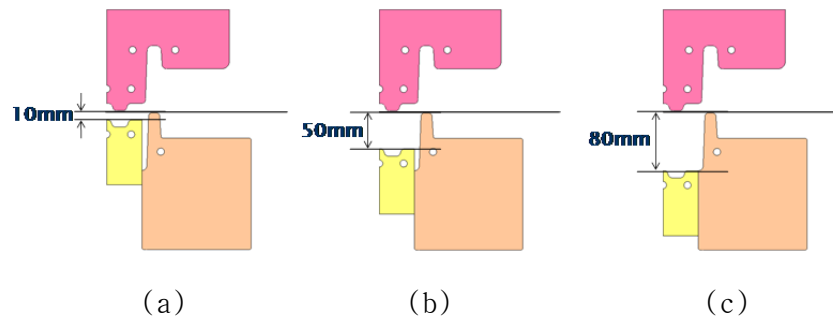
Three positions of the lower holder: (a) 10mm below the initial blank position, (b) 50mm, and (c) 80mm
